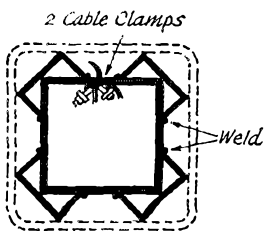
This sketch shows how short pieces of channel iron, welded across the corners of the 4-inch column near its bottom end, keep the inner column central in the outer column. The corners of the channel pieces should be filed slightly round to make a loose fit.
